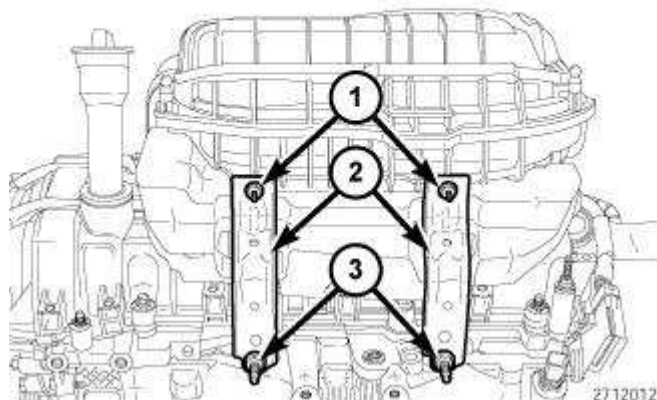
Nuts, Stud Retainers & Upper Intake Manifold Support Brackets
